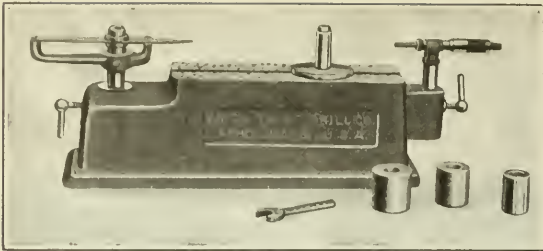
Fixture for testing Concentricity of Periphery and Bore of Milling Cutters and Position of Face of Cutter Teeth of the Radial Type
